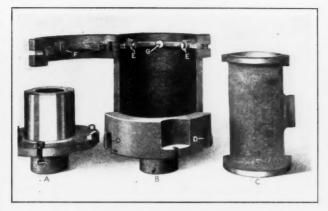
Two Chucks used for holding the Power Reverse Cylinder on the Turret Lathe
